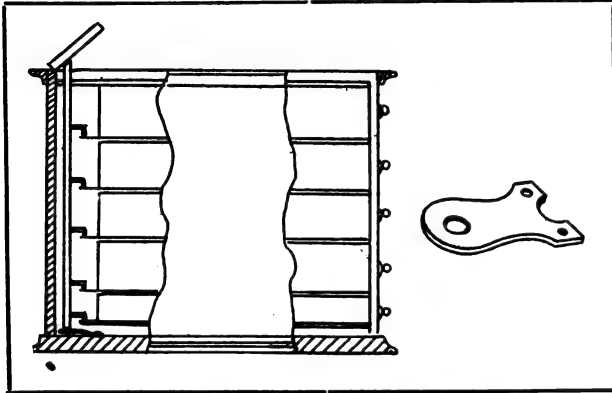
Arrangement for Automatically Locking a Tool Chest Made of Curtain Hangers and Hooks.
